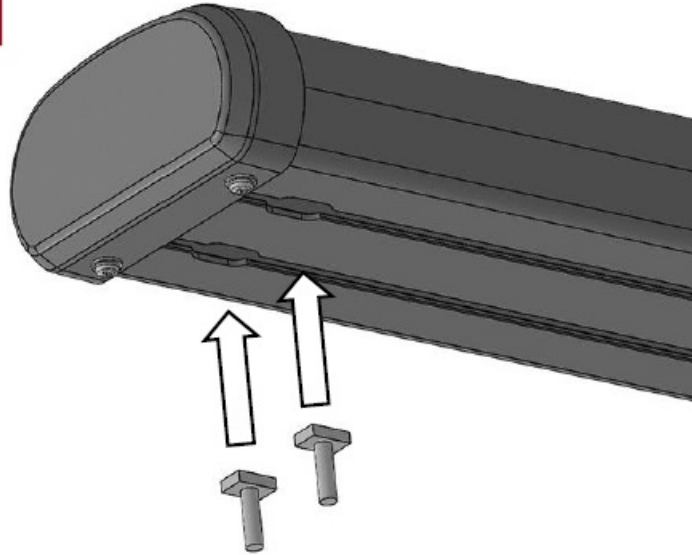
(Fig 5) Passenger/Right 2nd mounting location
